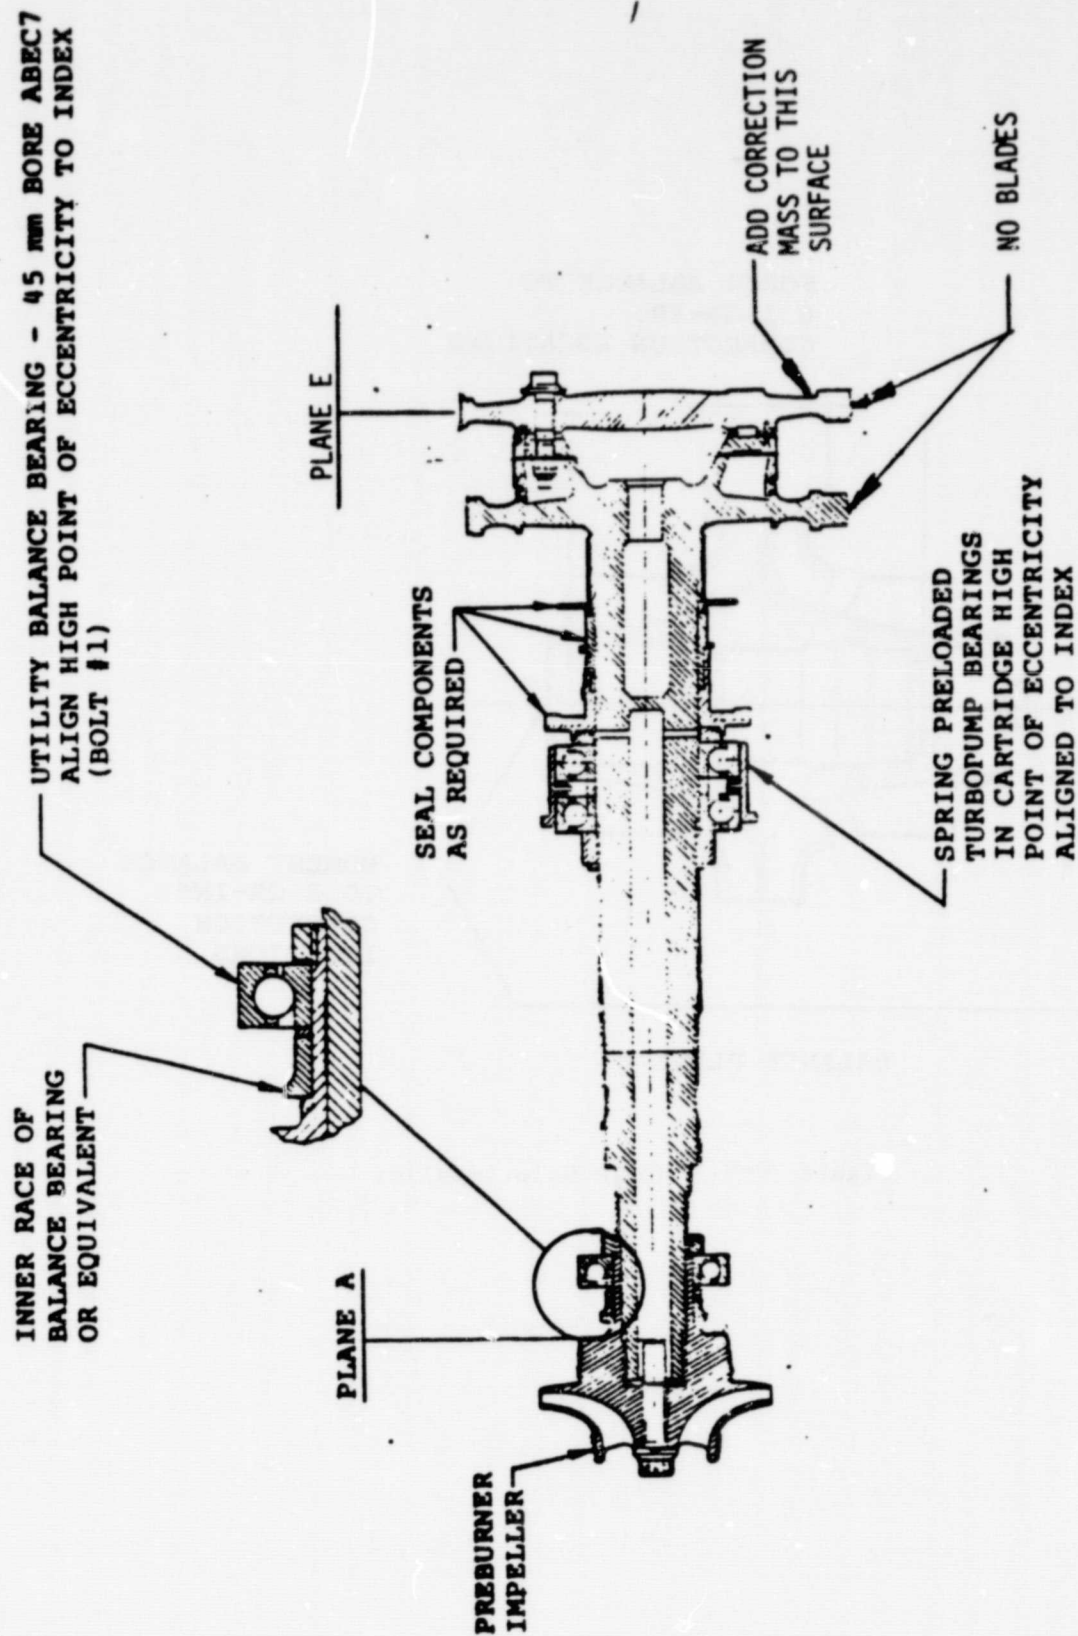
HPOTP Turbine/Preburner Balance Assembly
